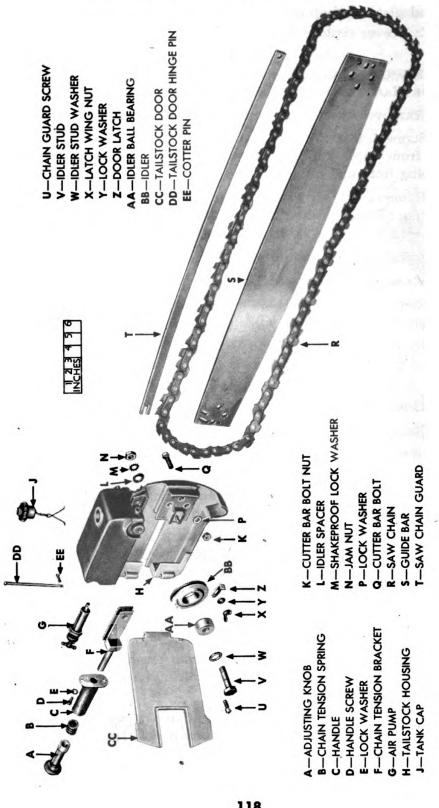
Tailstock End of Pneumatic Timber Saw — Exploded View
